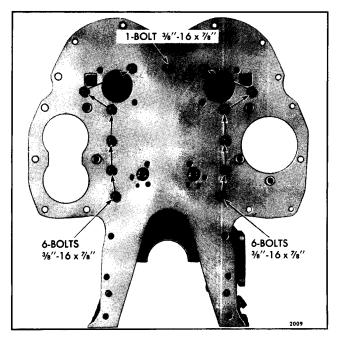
Cylinder Block Rear End Plate Mounting (3-53 Engine)
